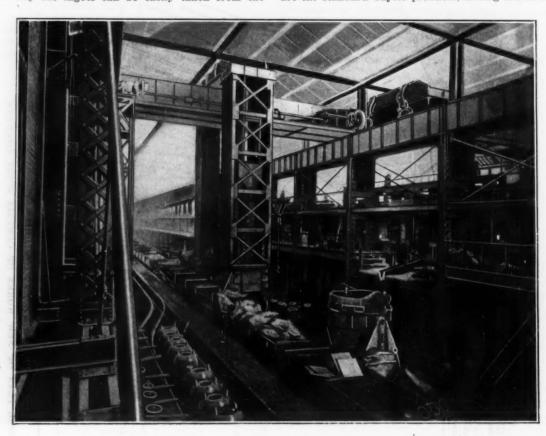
Sellers 90-Ton Ladle Crane.
